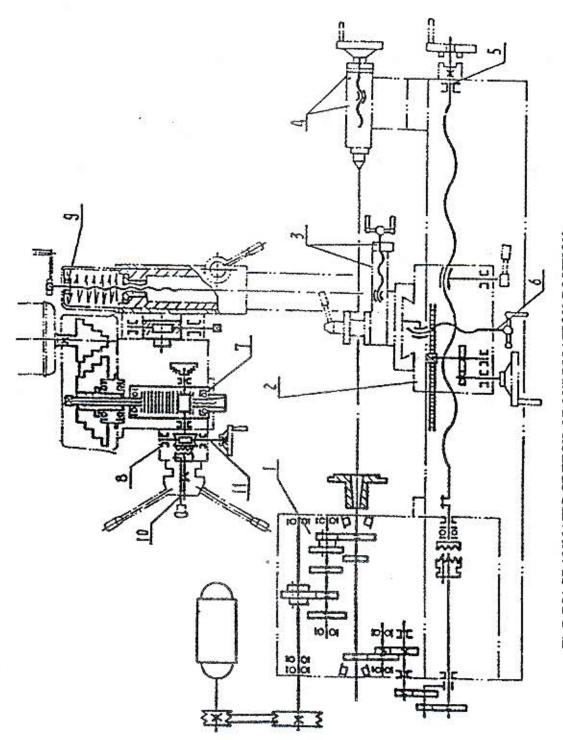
DIAGRAMMATIC SRETCH OF LUBRICATION POSITION
